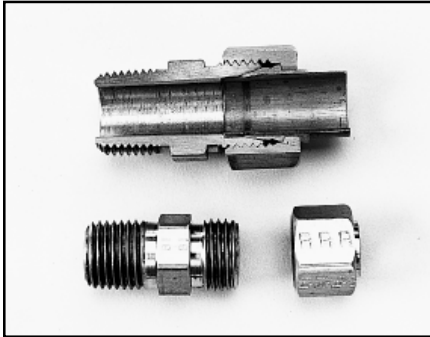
Assembled Intru-Lok (Ferrule "Bites" into tubing)
